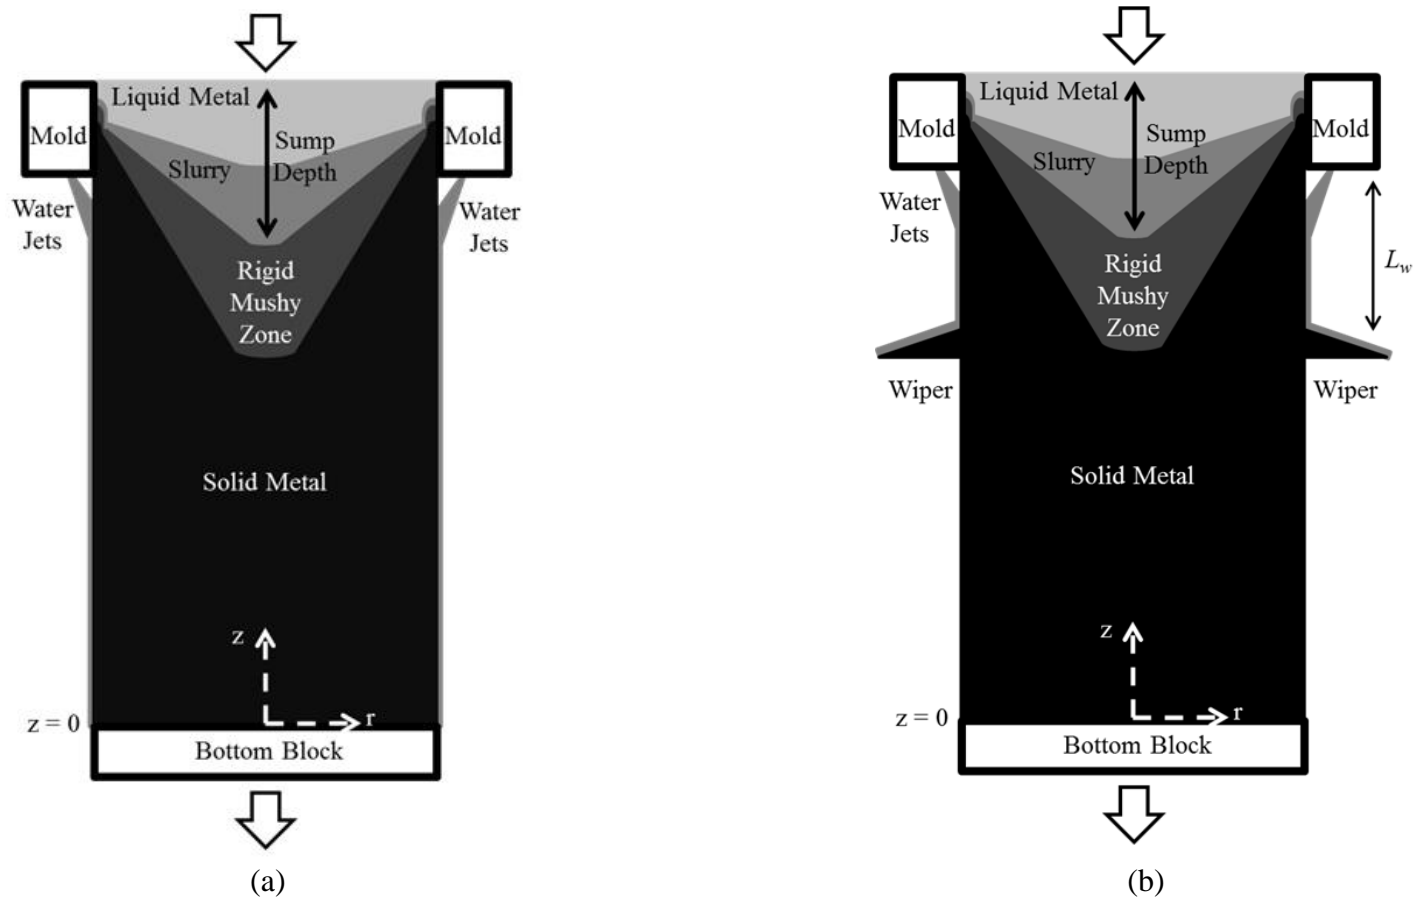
Schematic of direct chill casting process for round ingots (a) without a wiper and (b) with a wiper.
